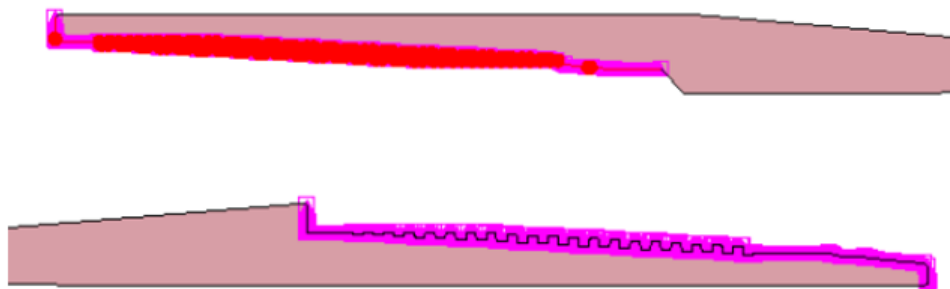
Local Seeds – Seal, Threads and Shoulder edges
